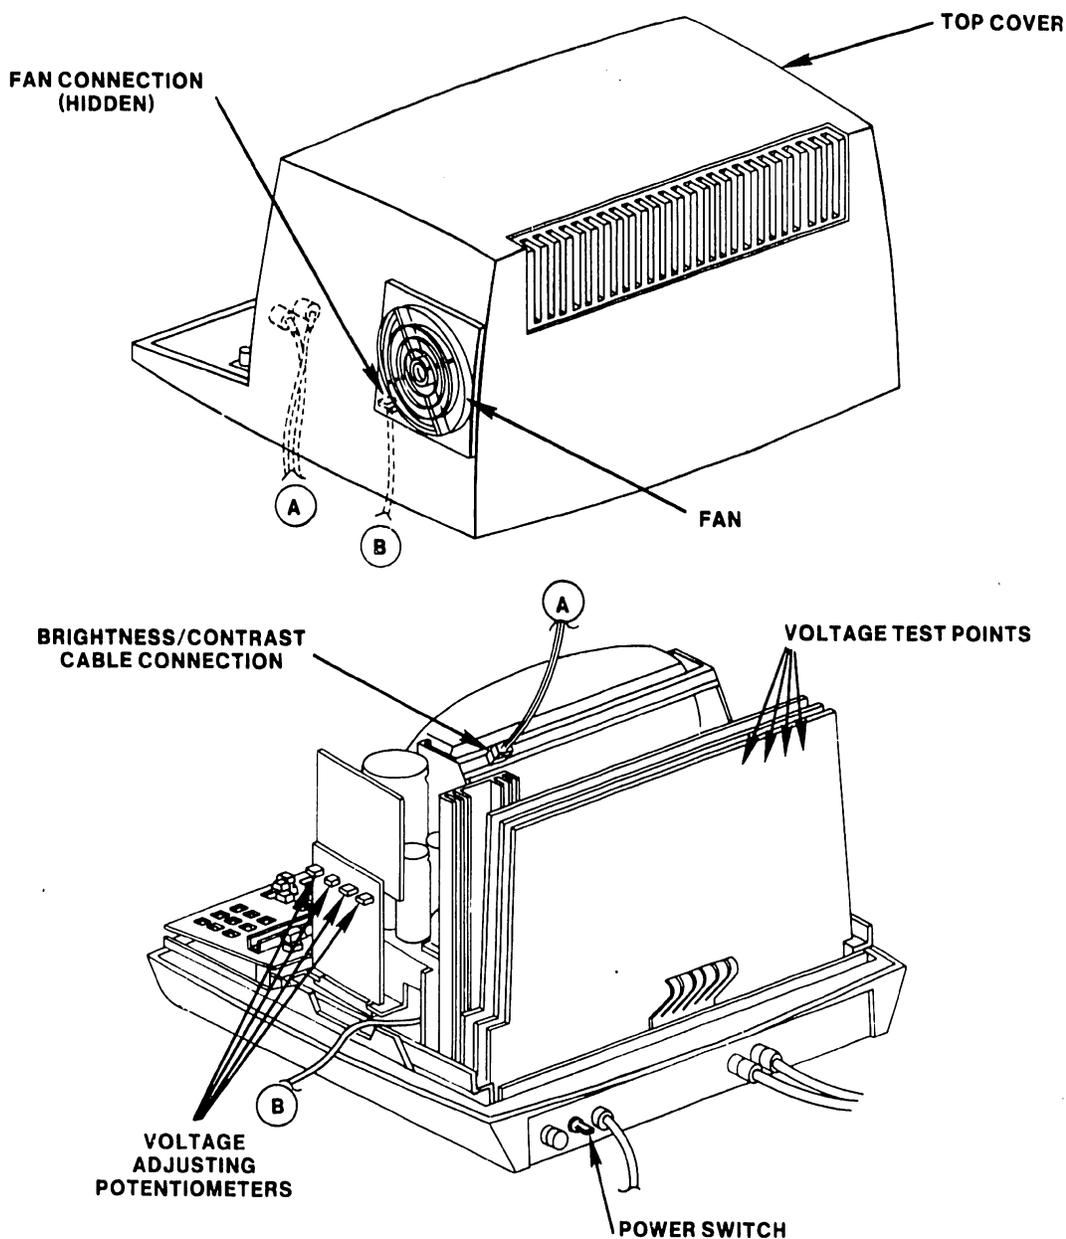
CRT WORKSTATION CHECKS AND ADJUSTMENTS
